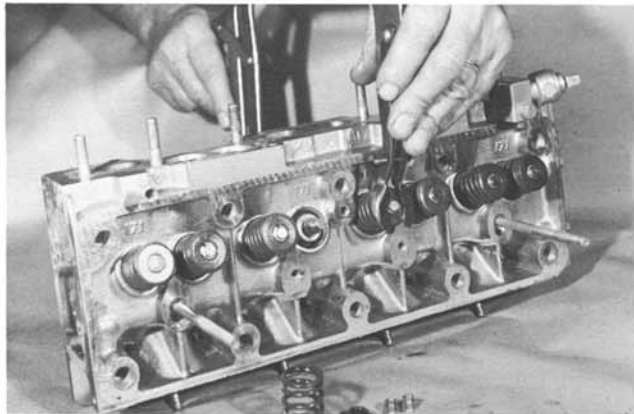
REMOVING VALVE SPRINGS AND VALVES
